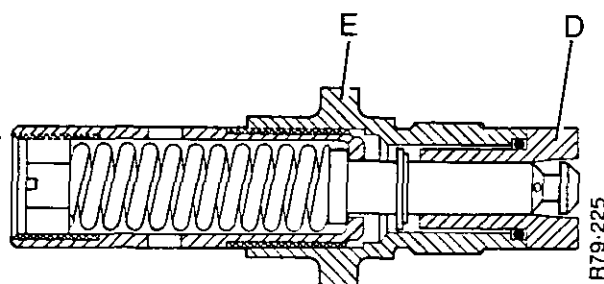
ASSEMBLY OF THE FLOW VALVE
